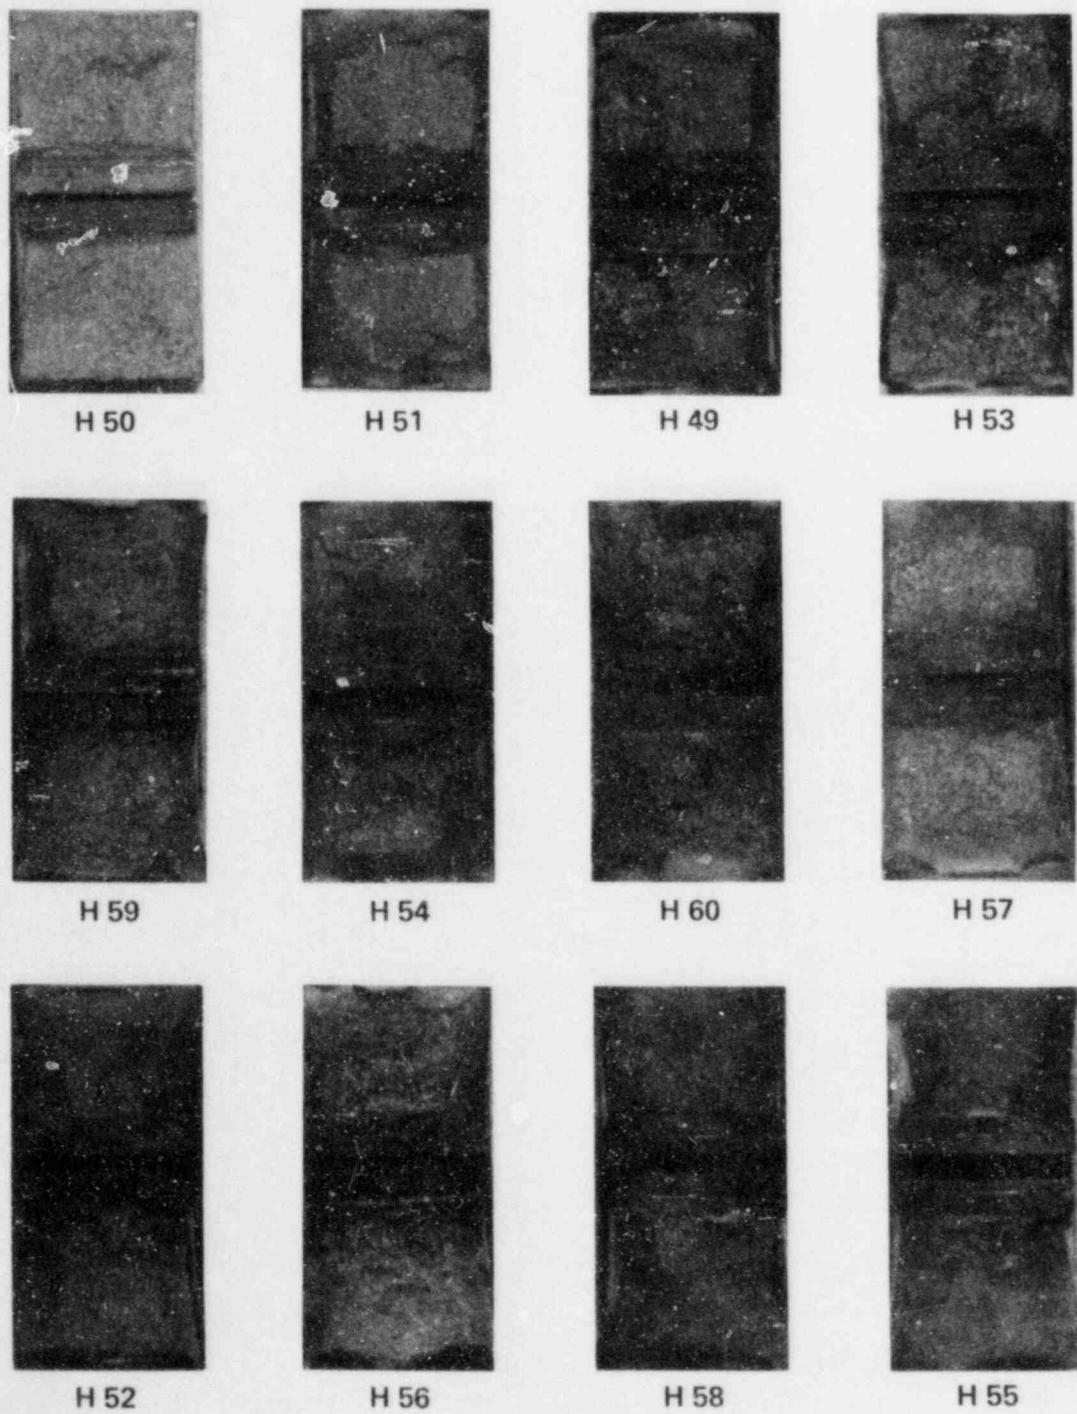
Charpy Impact Specimen Fracture Surfaces for Sequoyah Unit 2 Weld Heat Affected Zone Metal
